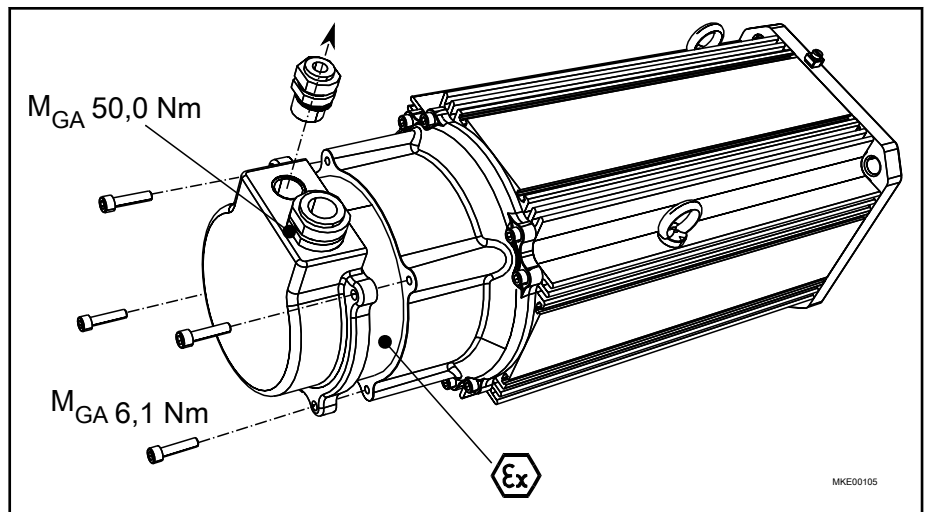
Electric Connection MKE118 Housing Design "E"
